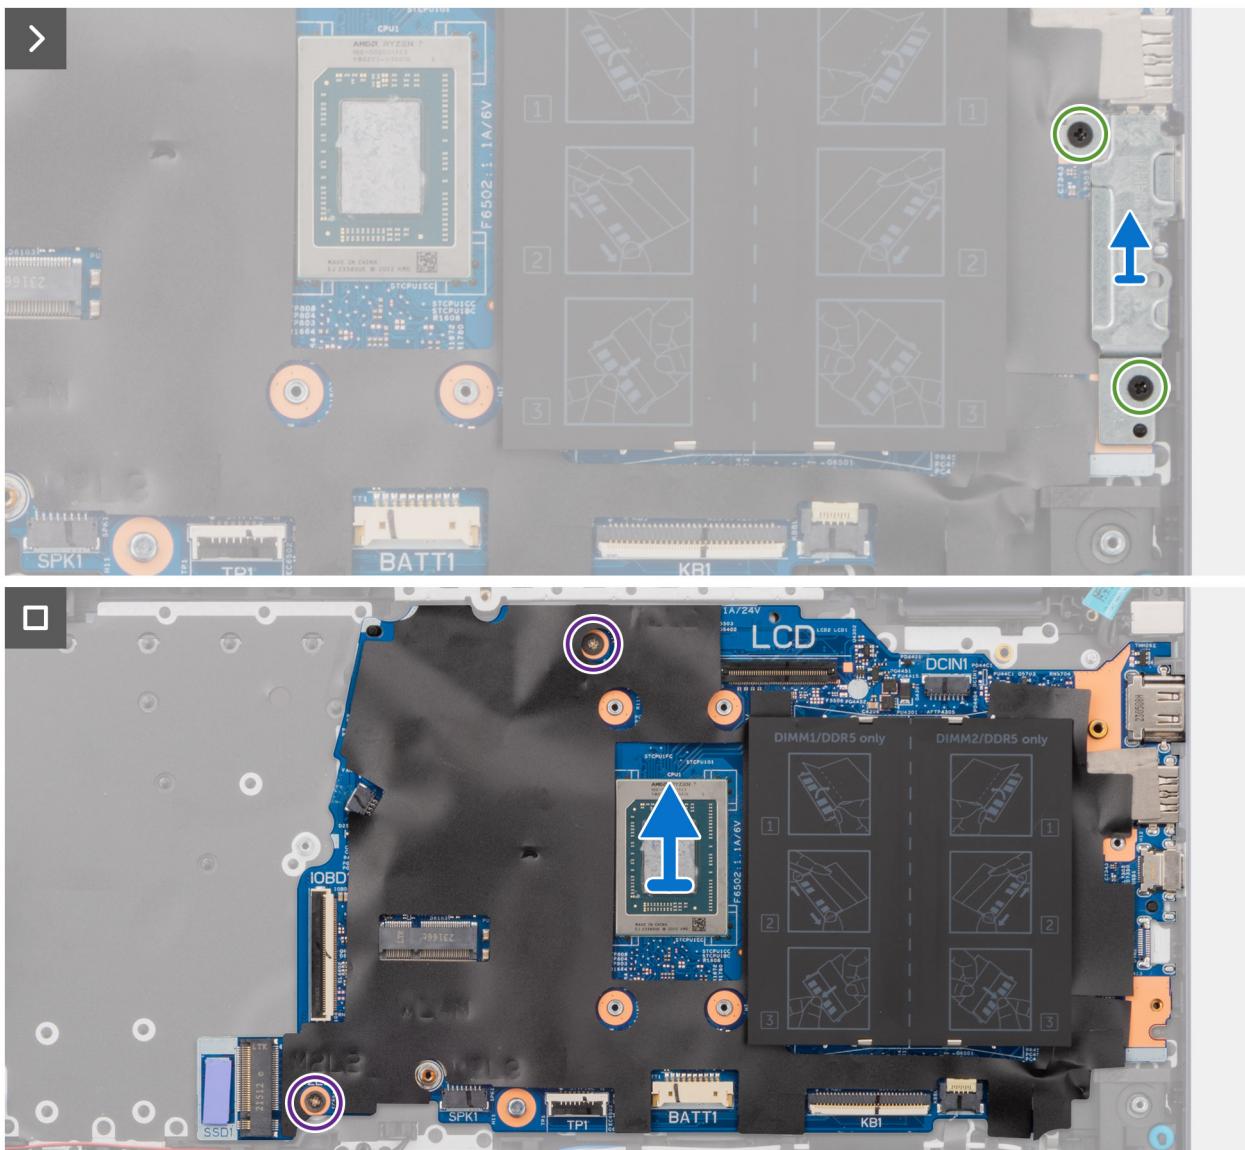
Removing the system board (for computers shipped with an aluminum chassis)
